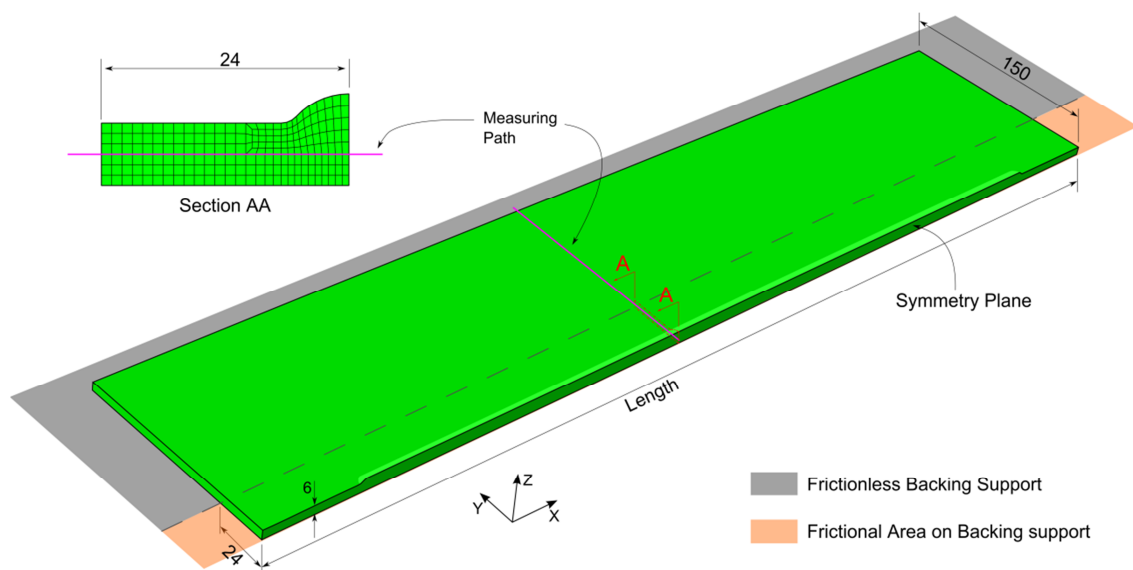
Half of workpiece, and transverse section of weld bead and surrounding material (dimensions in mm).
